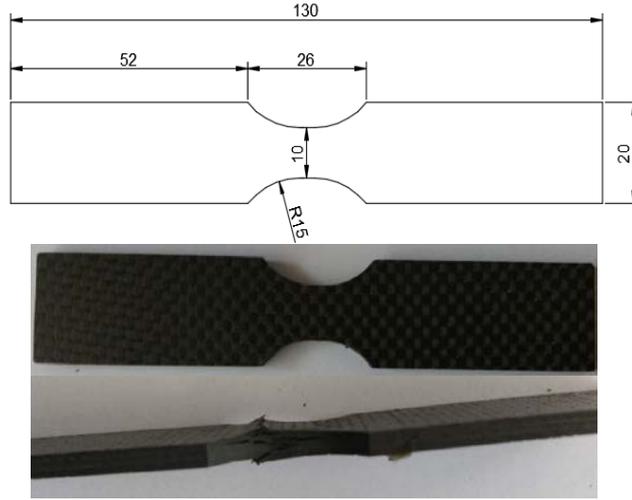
Tensile-compressive and compressive-compressive specimens and failure mode.
